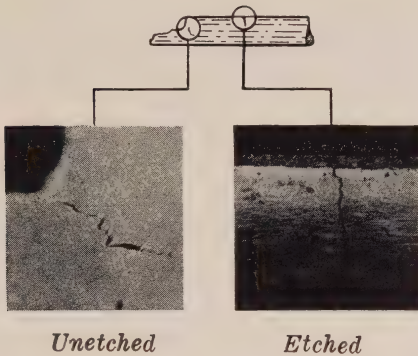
Nonmetallic inclusion located at split fatigue fracture and a second fatigue crack in the process of development. Mag. 50 \times .
